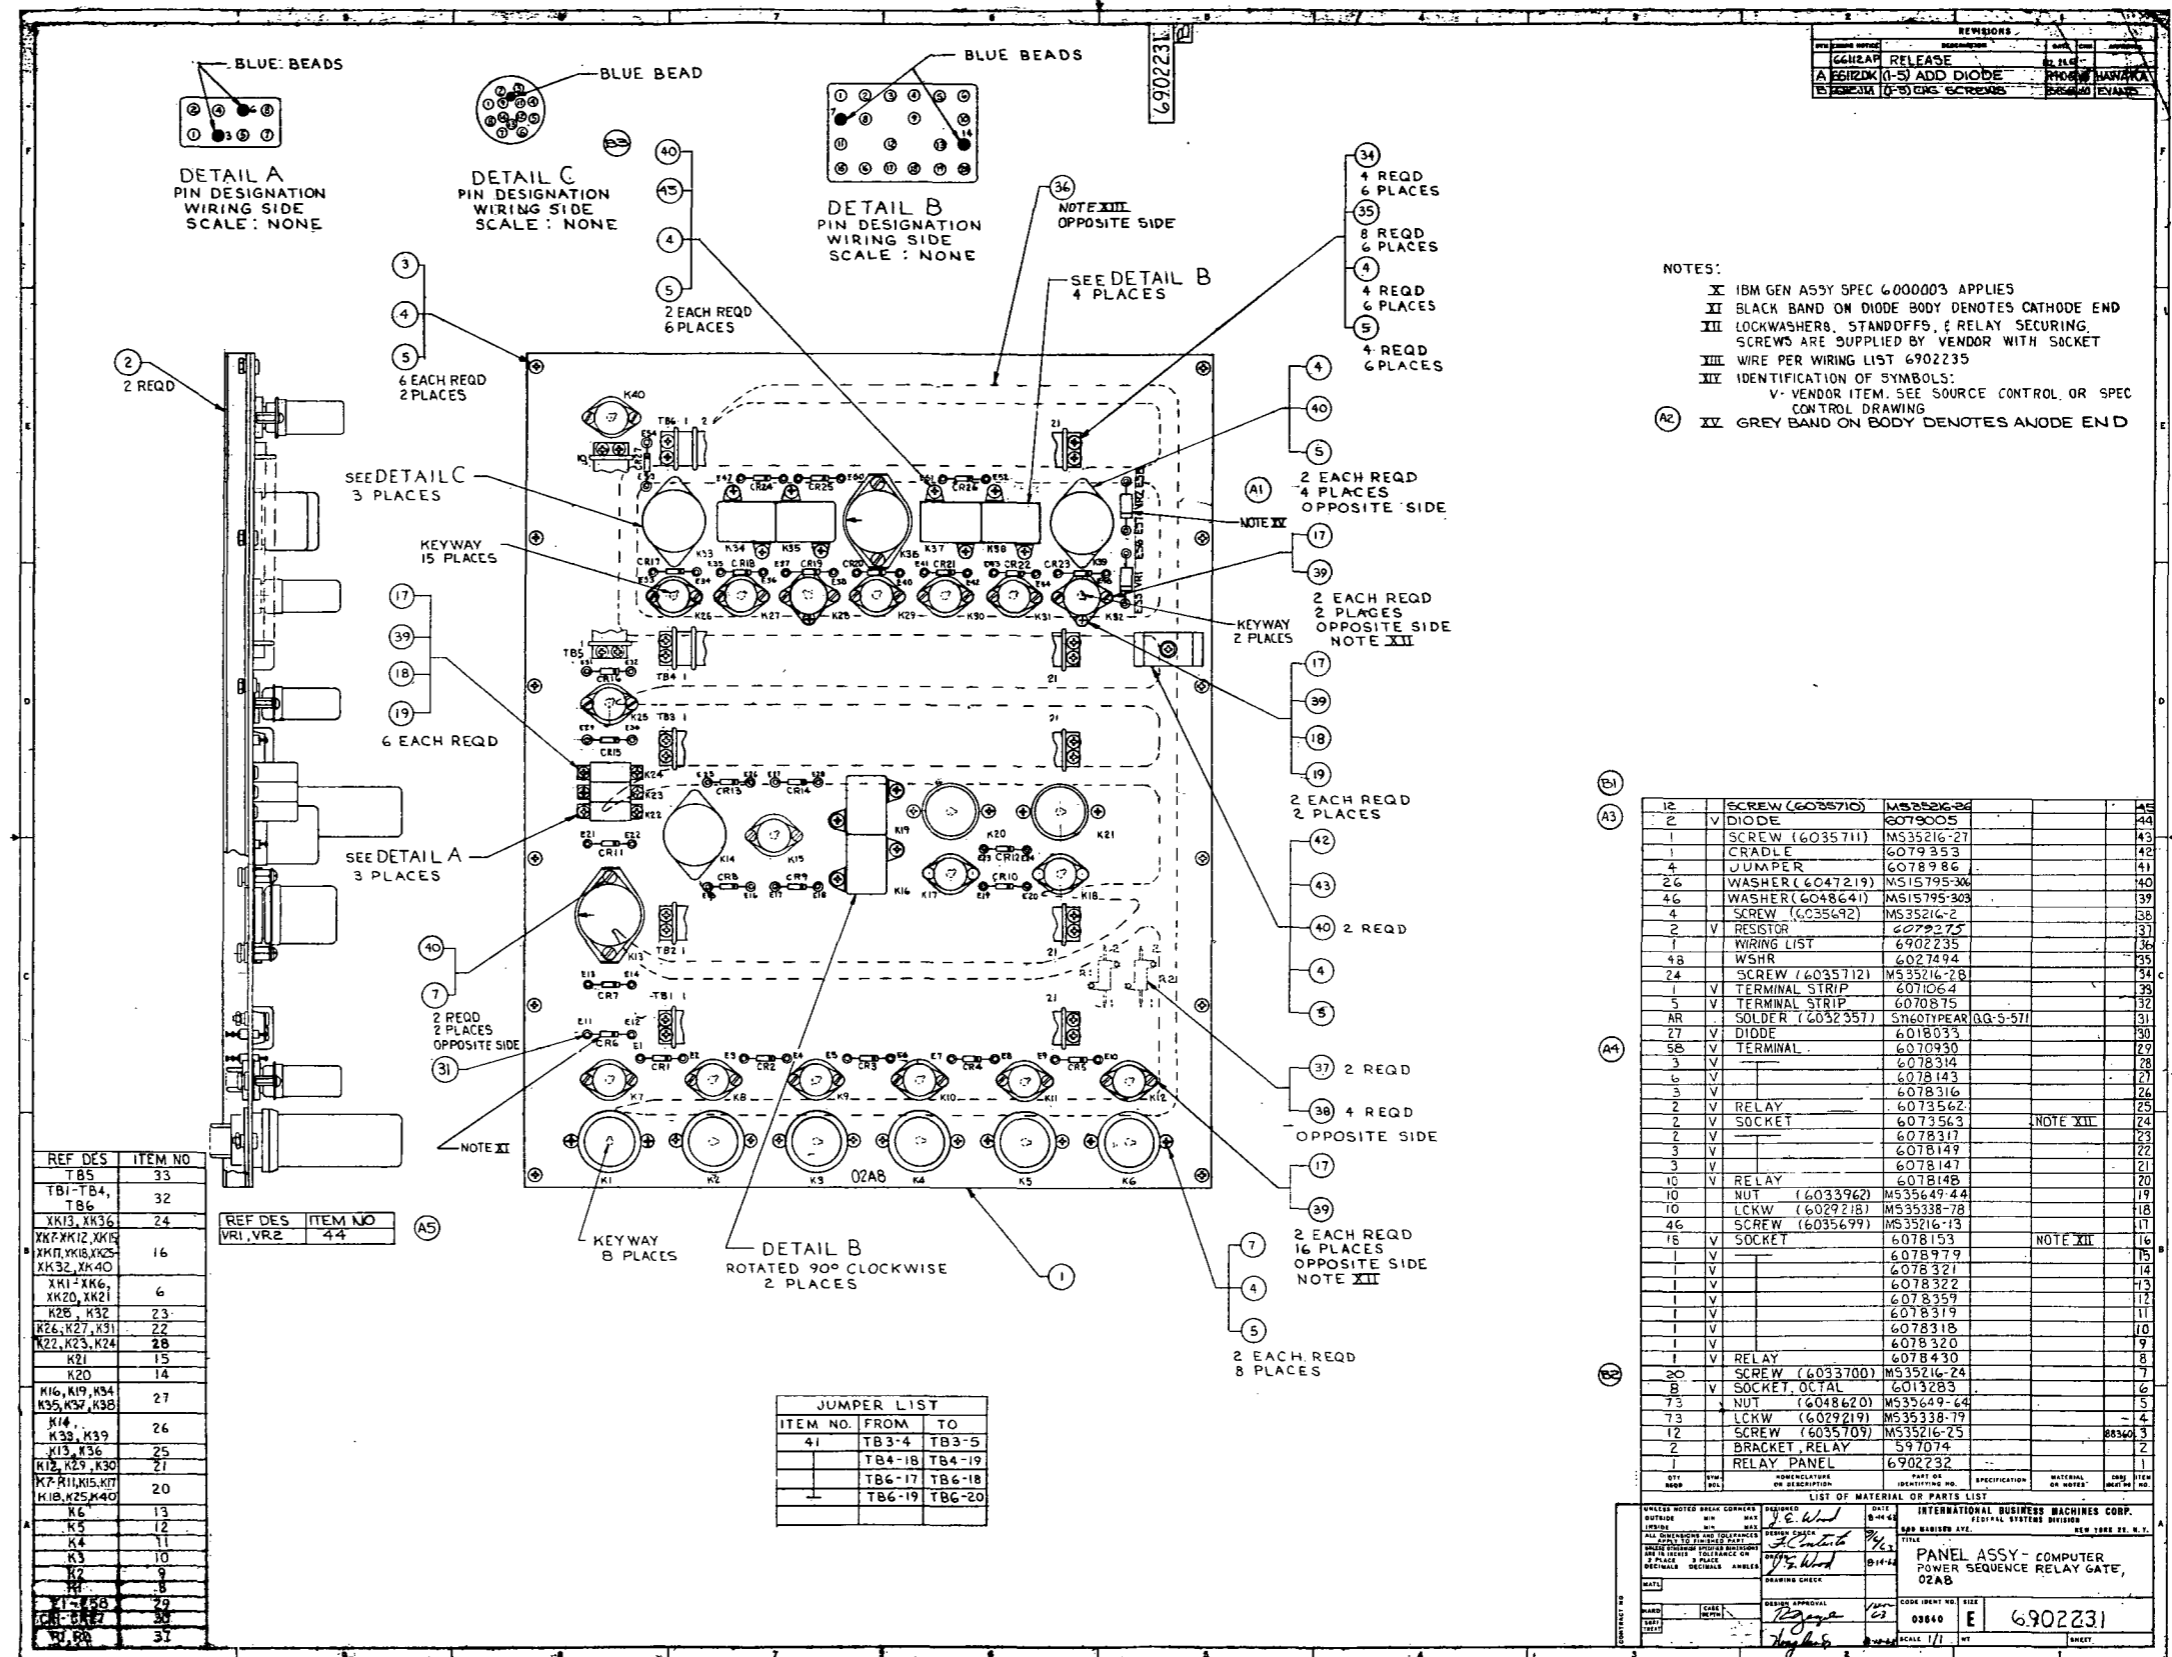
Computer Power Sequence Relay Gate (02A8) Assembly Drawing
